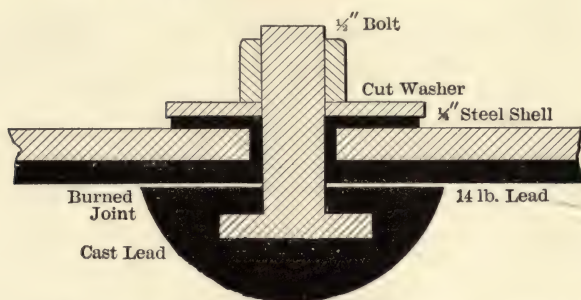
Detail of Montejus lead lined tank construction. Showing method of bolting lead lining to steel shell.
